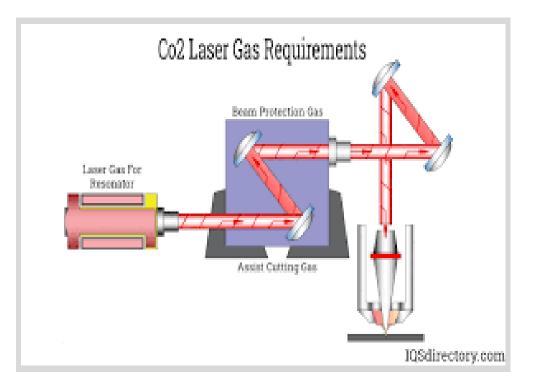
The welding head of a high-power CO2 laser.
